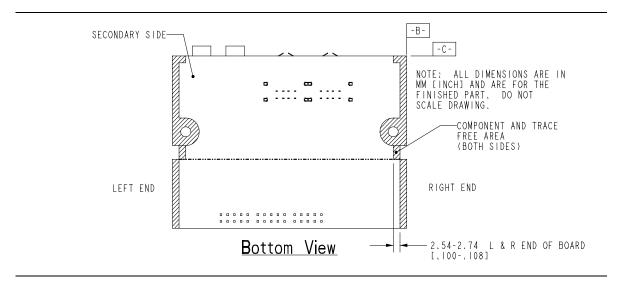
Front Panel I/O Board Dimensions (Bottom View)
